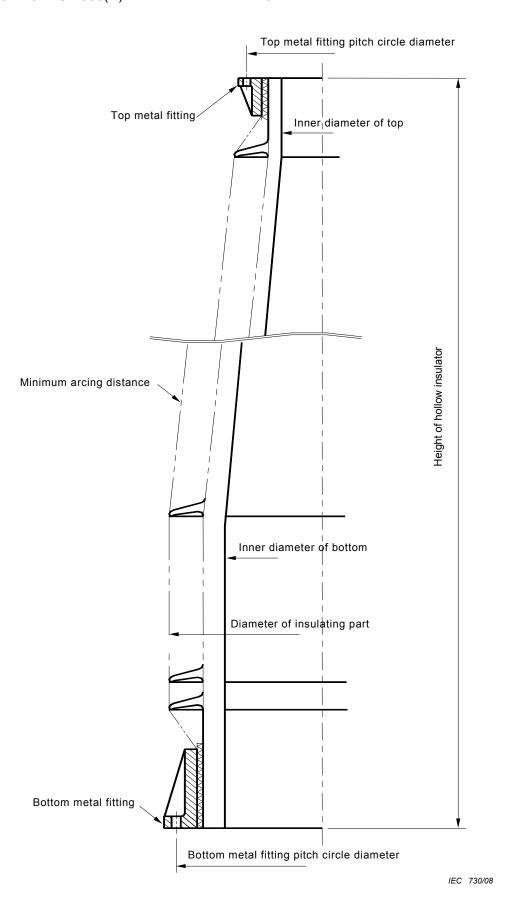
Example of a taper type hollow insulator with metal fittings on both ends
